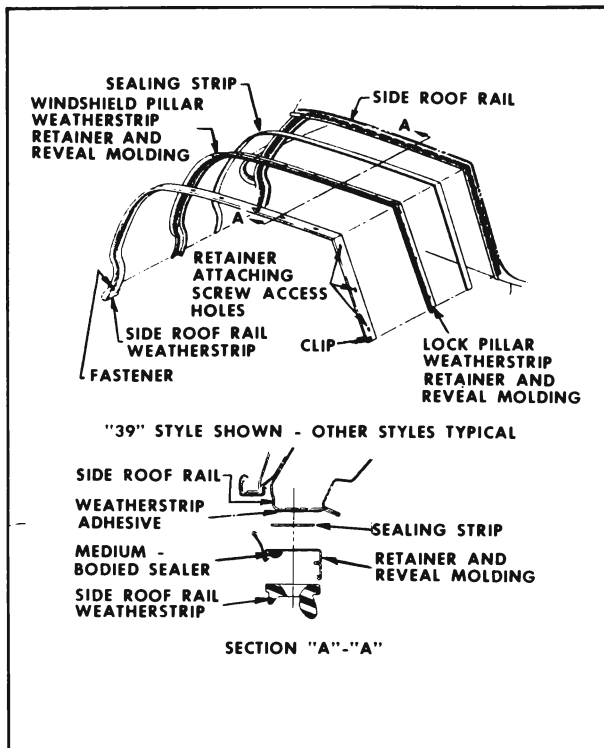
Side Roof Rail Weatherstrip Assembly
